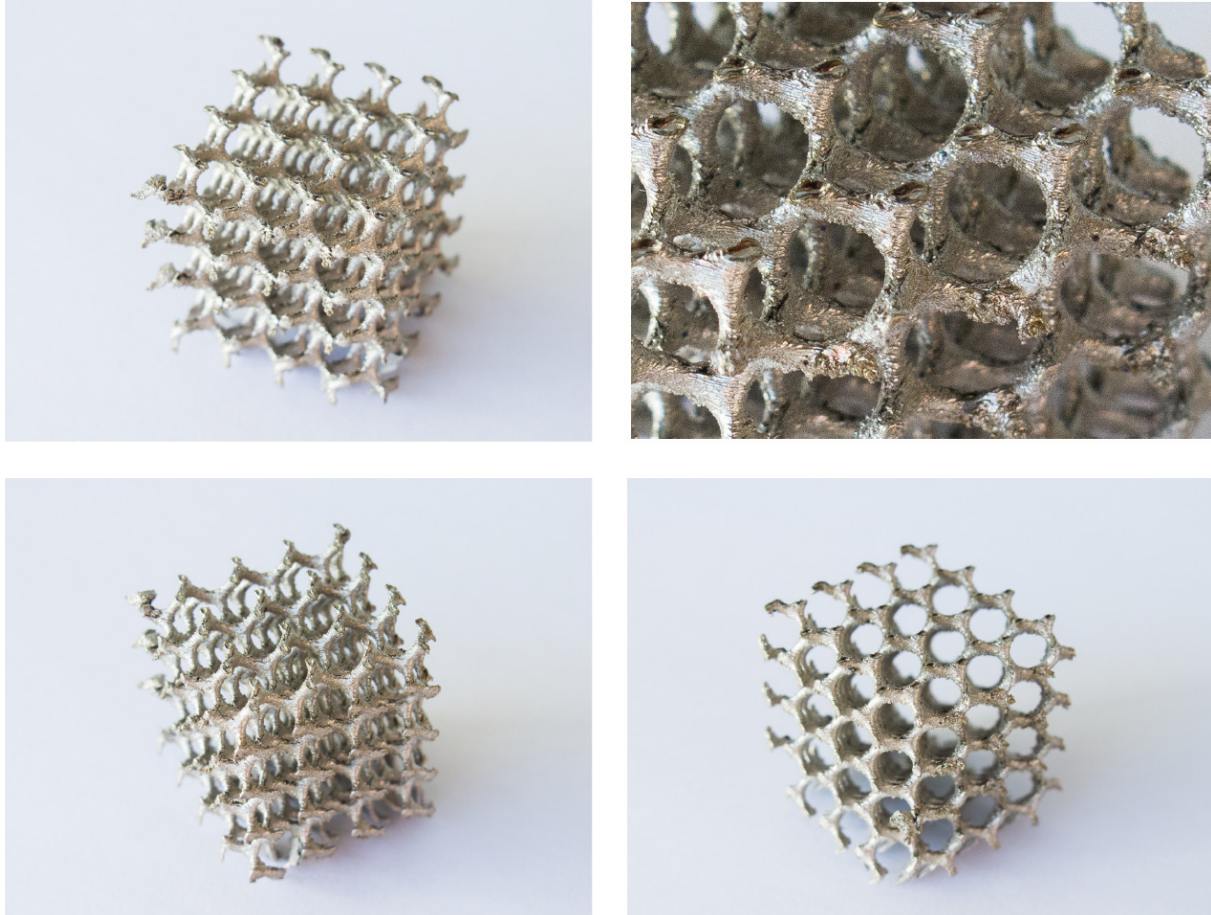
The gyroid test geometry printed in Inconel. The surfaces are quite rough, but the piece was printed fine.
